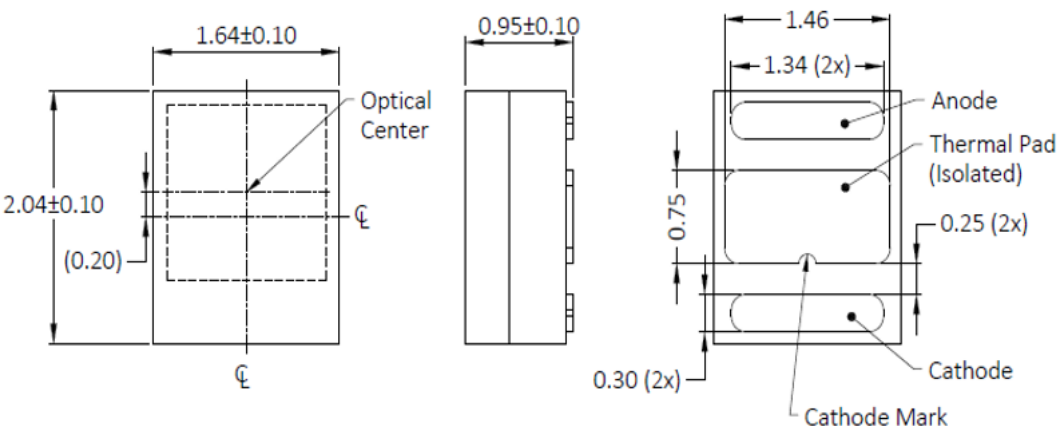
Mechanical dimensions for LUXEON CZ ES Red and Deep Red
